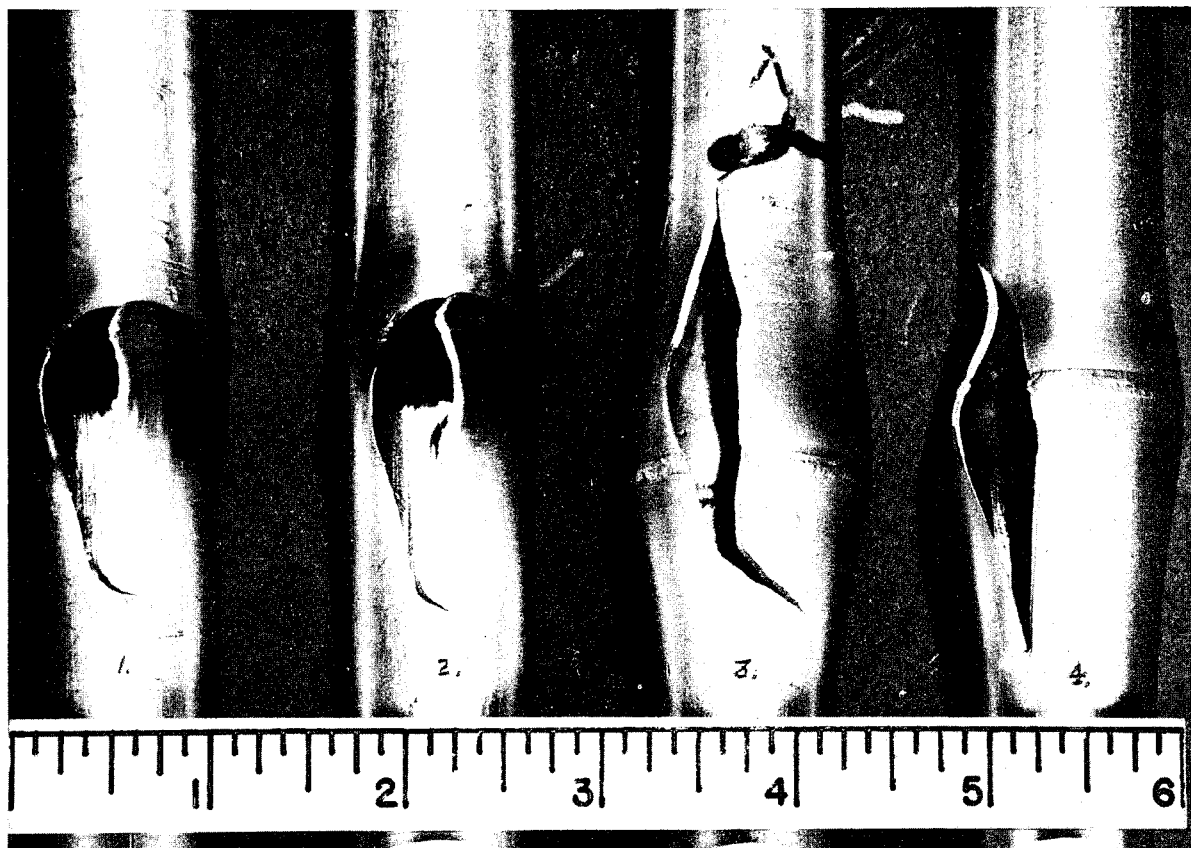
Burst-pressure test specimens, RT, of a 304L .049×1-inch O.D. tube-flange weld.
